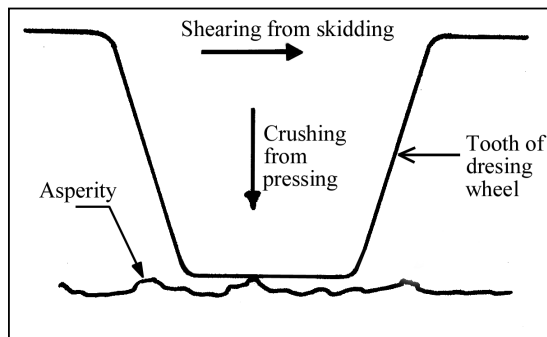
Wear mechanism beneath the tooth of a dressing wheel
